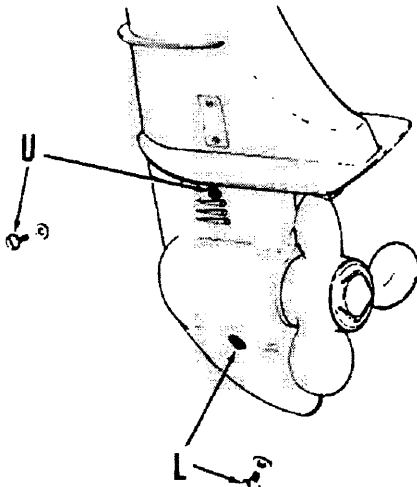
View of gearcase showing upper (vent) plug (U) and lower (drain/fill) plug (L). Non-gear shift type units have drain/fill plug on opposite side of gearcase.
